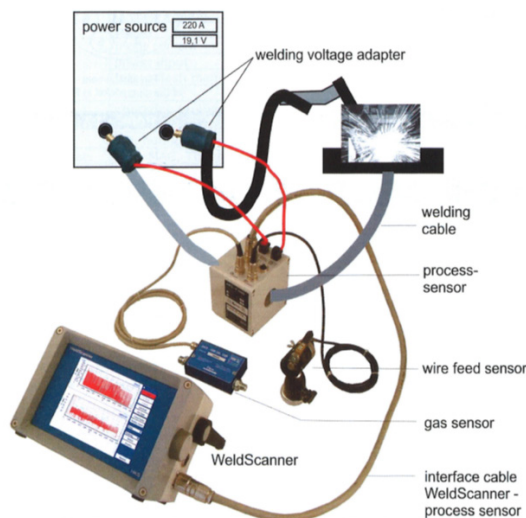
A welding DAQ device employed to capture and record welding parameters
